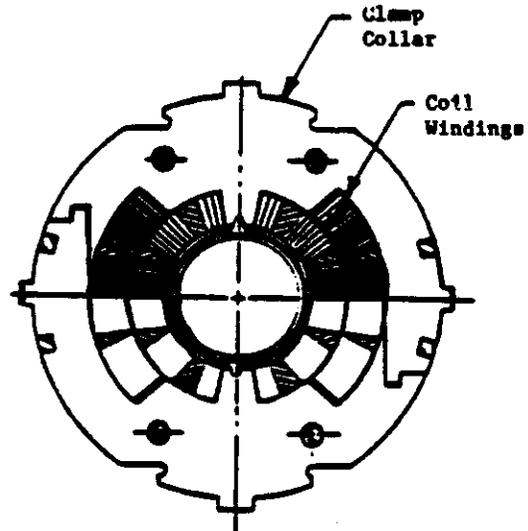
Cross-Section of a SSC Design D Collared Coil Assembly.
